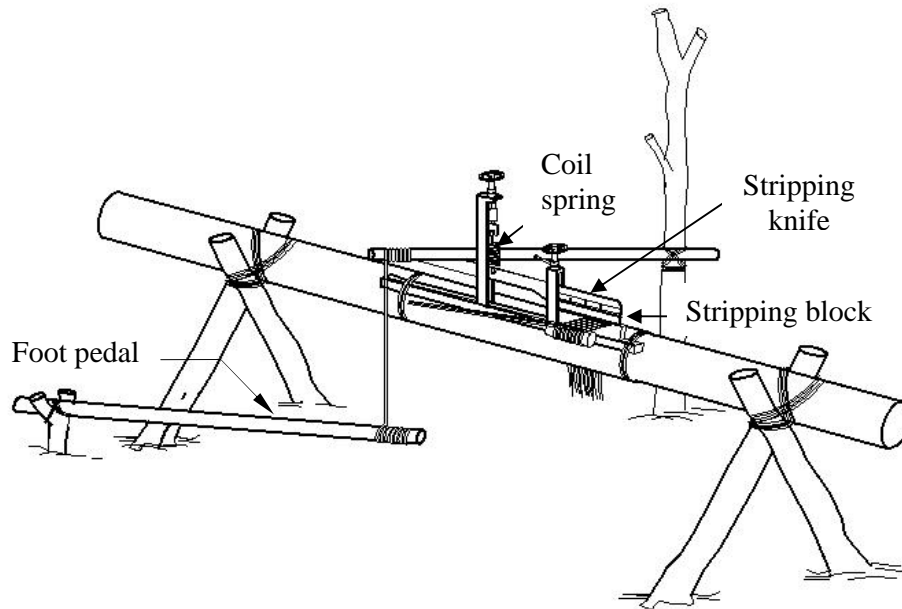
Improved hand-stripping (Hagotan) device (FIDA design)
